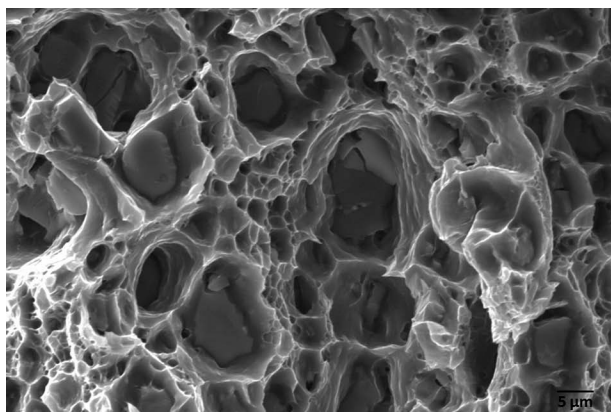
Higher magnified image of the fracture surface shown in Fig. 73. The presence of cracked CuAl_2 can be seen
